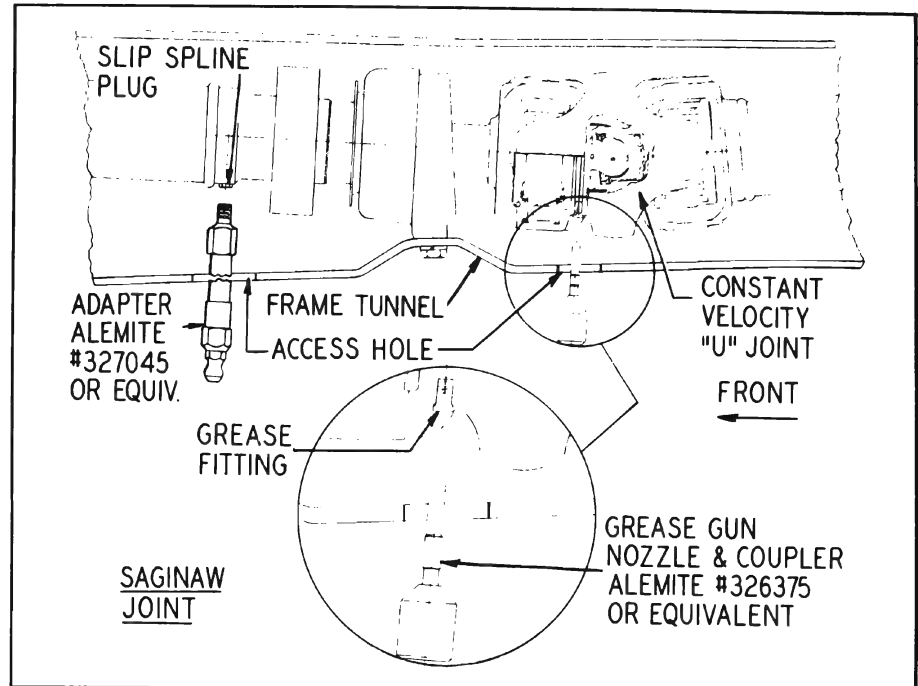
Propeller Shaft Slip Spline and Constant Velocity Universal Joint Lubrication Points
